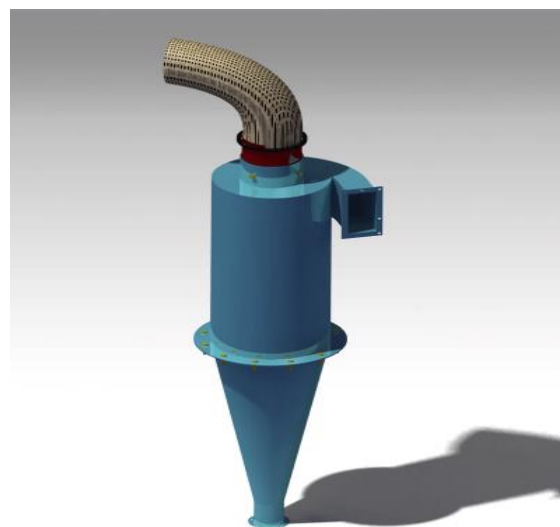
Isometric view of assembly of cyclone separator with flexible tube
